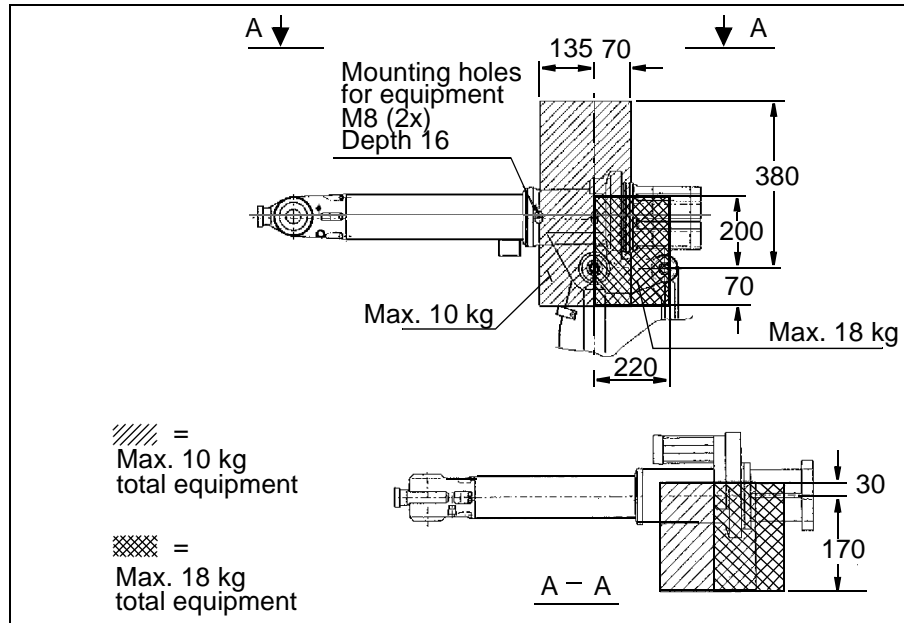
The shaded area indicates the permitted position (center of gravity) for any extra equipment mounted on the upper arm (dimensions in mm).
